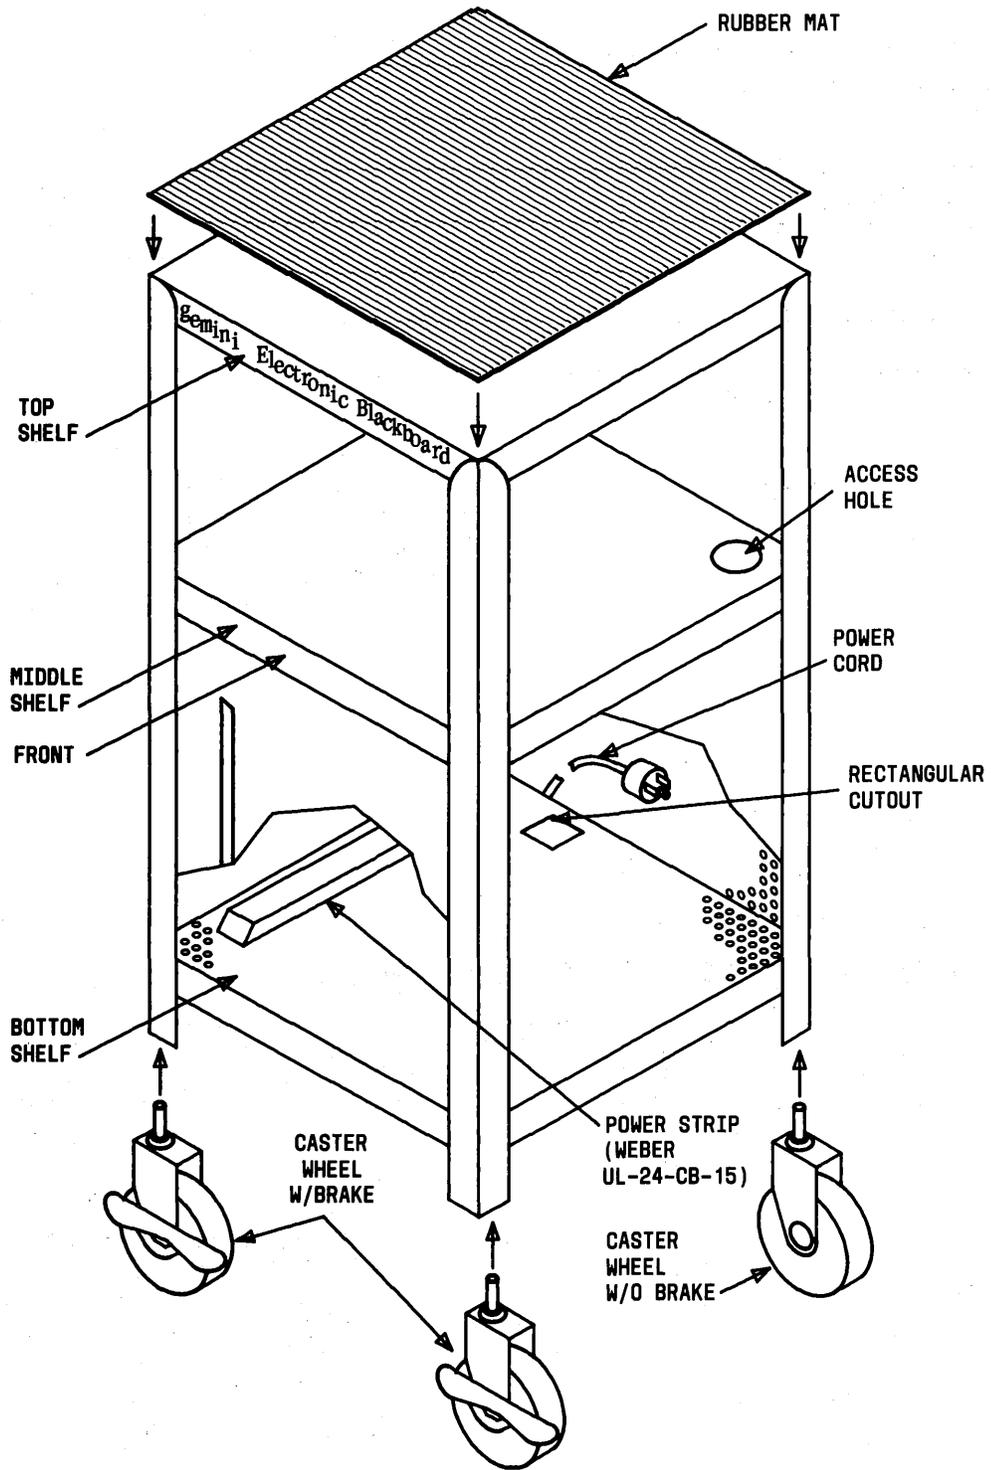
KS-21888 Cabinet Assembly Arranged for KS-21889-L3 Memory Unit
